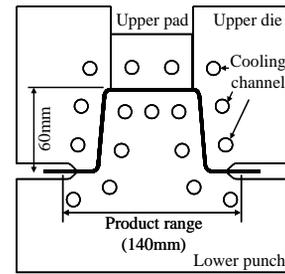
Schematic drawing of locally softened hot stamping for manufacturing hat shape part
